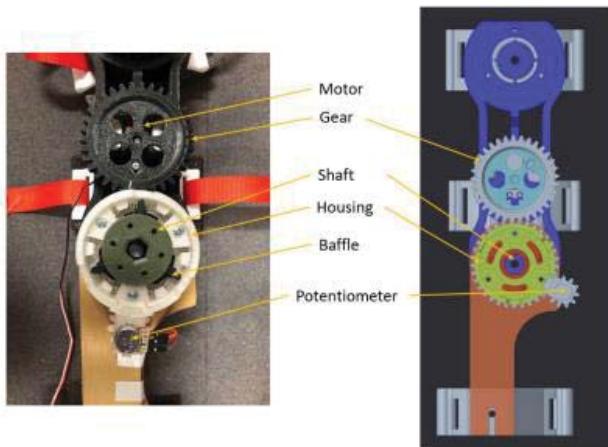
Buffer CAD design (right) and 3D-printed prototype (left). The design of the buffer is crucial as it allows a range of joint motion for the user to move to when using the exoskeleton. The baffle is locked in place when the motor is on, and the user can only move within a 10-degree angle. When standing still, there is no change in potentiometer voltage as the buffer does not move. The change in this signal indicates how much the exoskeleton needs to move to “compensate” the user’s movement. In other words, the exoskeleton shall “follow” the user’s movement in this instance. The potentiometer’s voltage changes can be interpreted as the buffer rotational angle that the exoskeleton needs to move to
